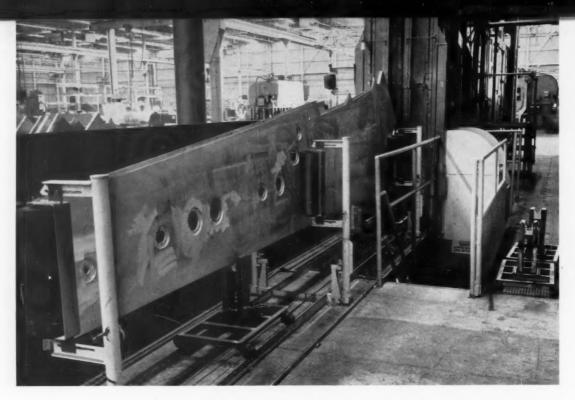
For vapor-blasting, the rough skin is loaded on dollies attached to a conveyor cable. Part is ready to enter the blasting station. Rubber rollers support skin during its passage through the machine.
